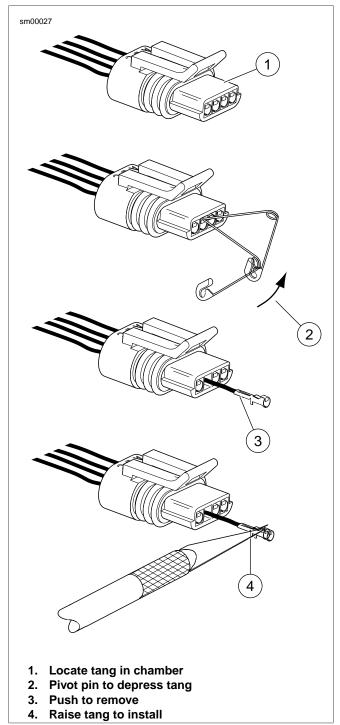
150 Metri-Pack Connector: Pull-to-Seat
